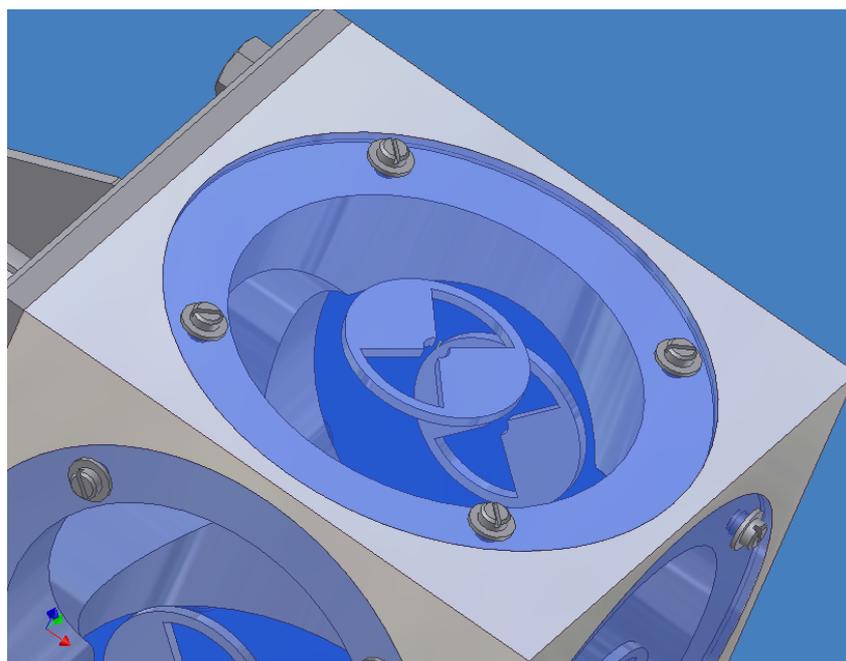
The detail showing the deformation detector furnished the steel inner face
